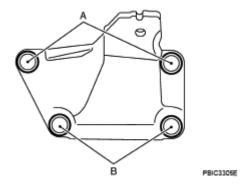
Identifying Engine Mounting Insulator Courtesy of NISSAN MOTOR CO., U.S.A.
